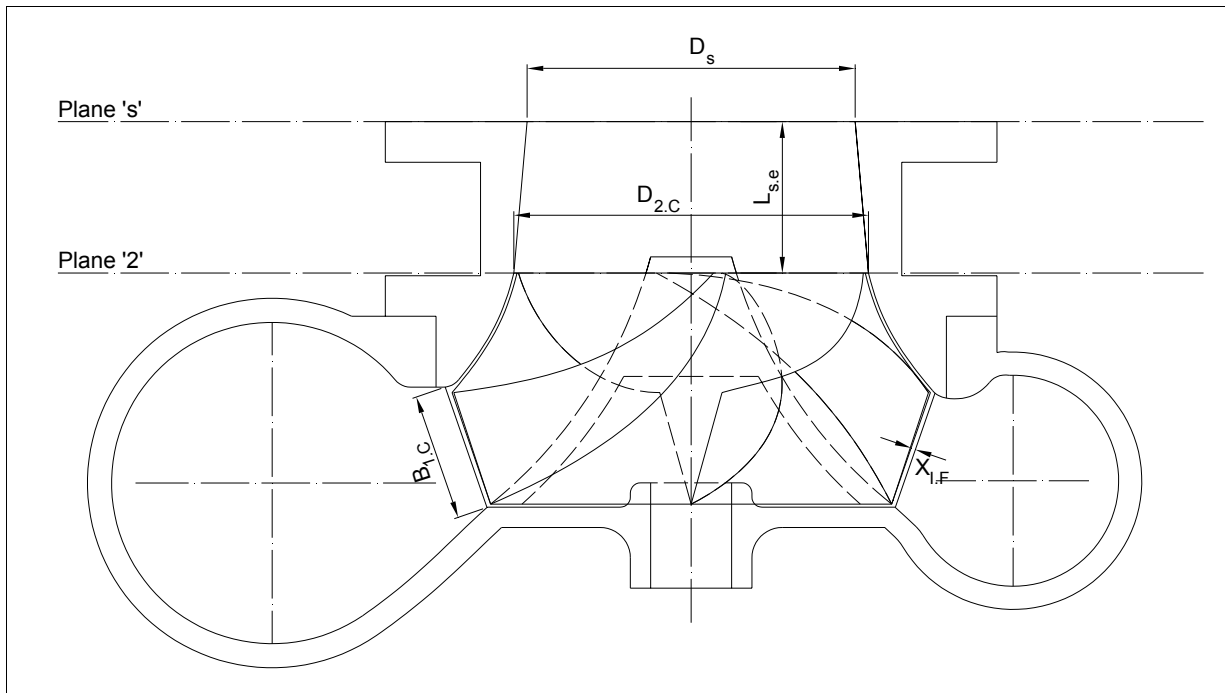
, Cross-sectional view of the impeller and volute casing a mixed flow PAT
